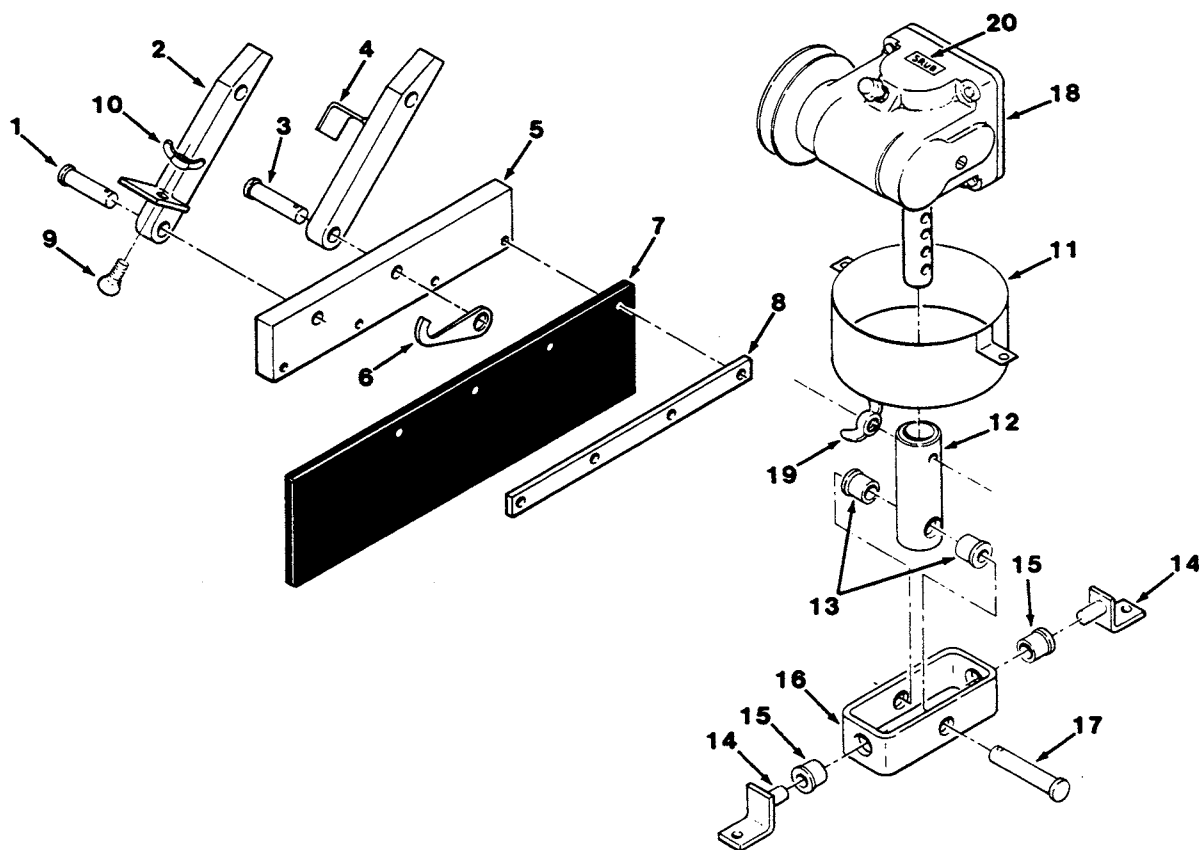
SIDE BRUSH AND SQUEEGEE ASSEMBLY
